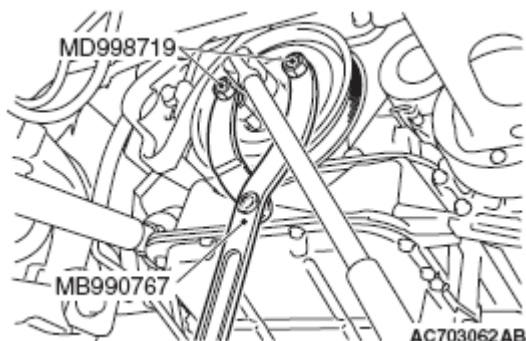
Removing Crankshaft Pulley From Crankshaft Using Special Tools MB990767 And MD998719
